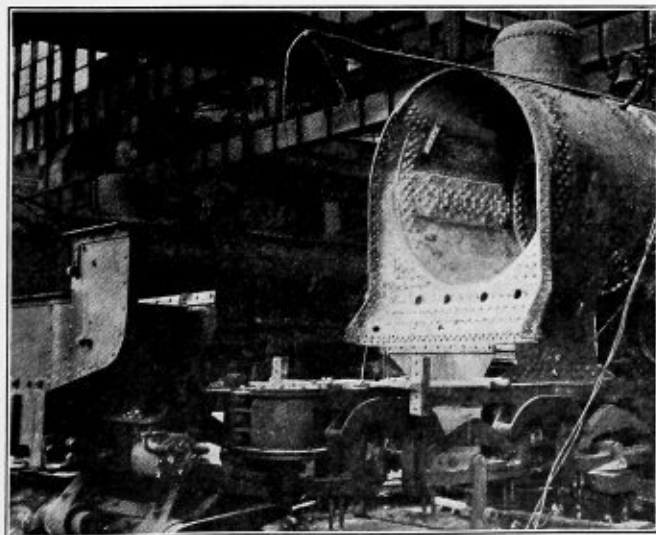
View Showing Boiler Back End Removed for Application of New Firebox
